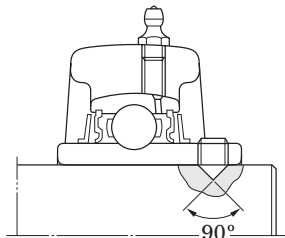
Drilled seat provided for shaft (for improvement in set screw tightening effect)
